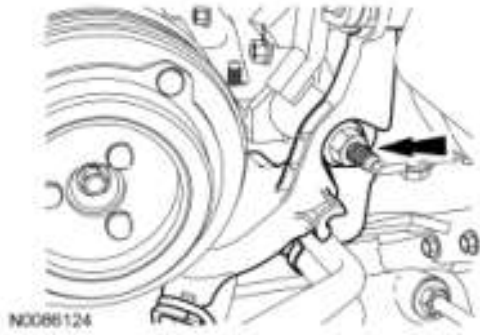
Locating Transmission Fluid Cooler Tube Support Bracket And Nut
